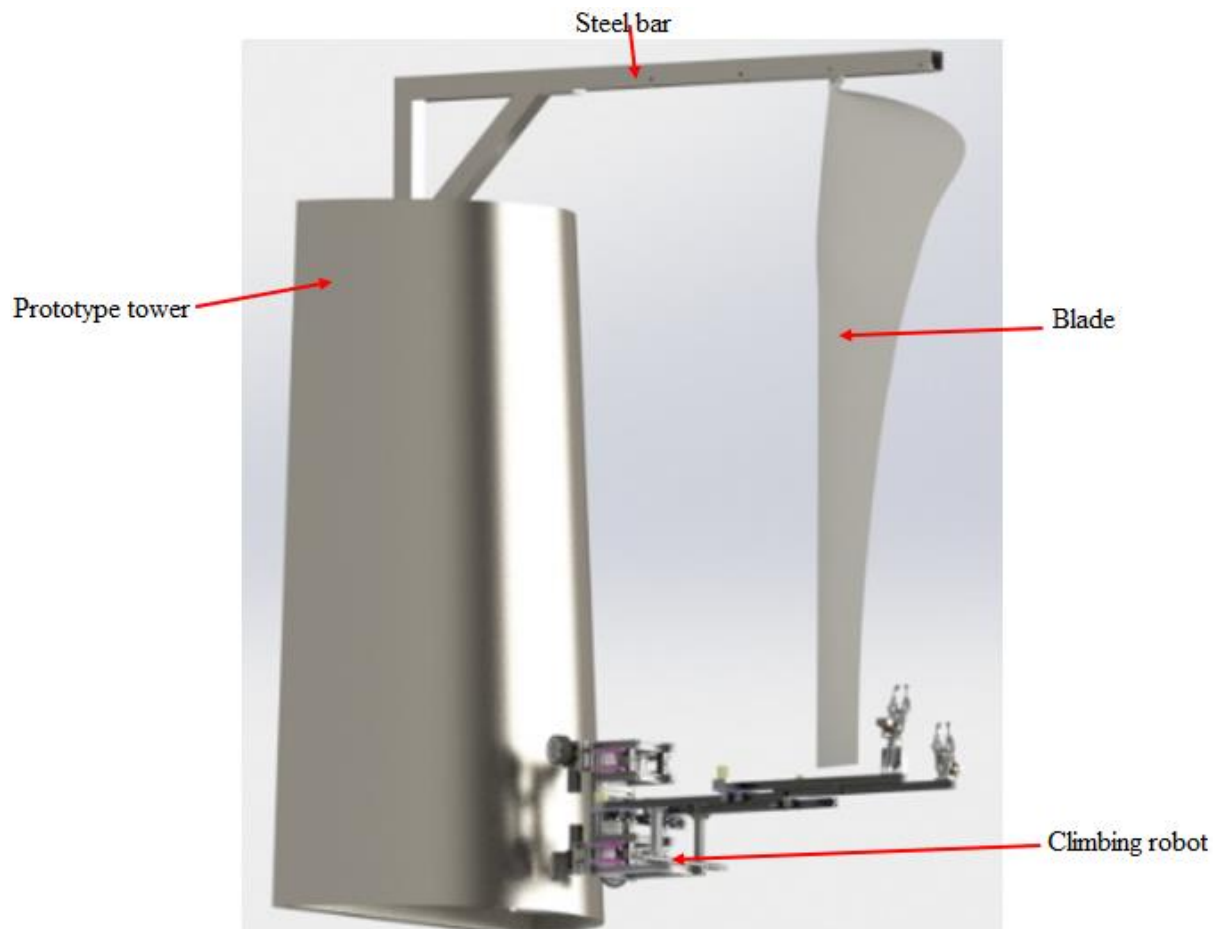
Assembly of wind turbine tower prototype and robot prototype
